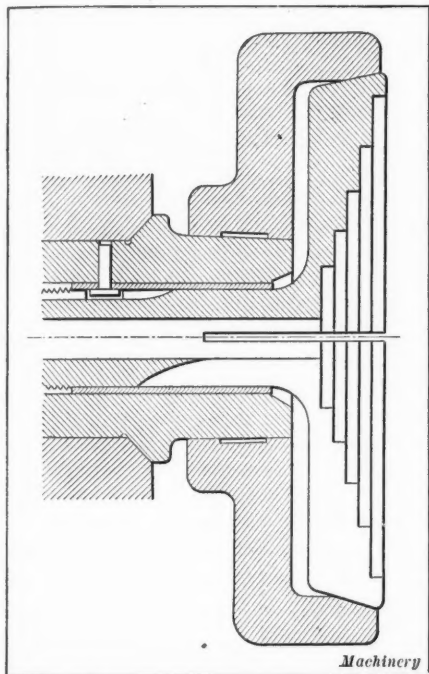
Large "Wheel" Type of Chuck for holding Disks
